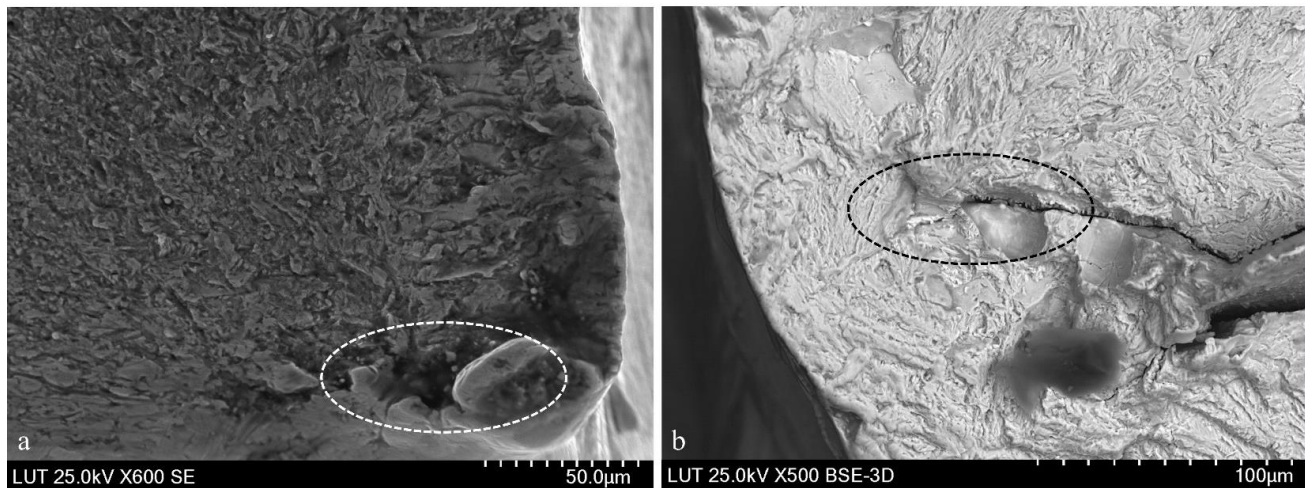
Fracture surfaces and burrs of (a) fiber laser cut edges S690 and (b) S1100 (2 Columns)
